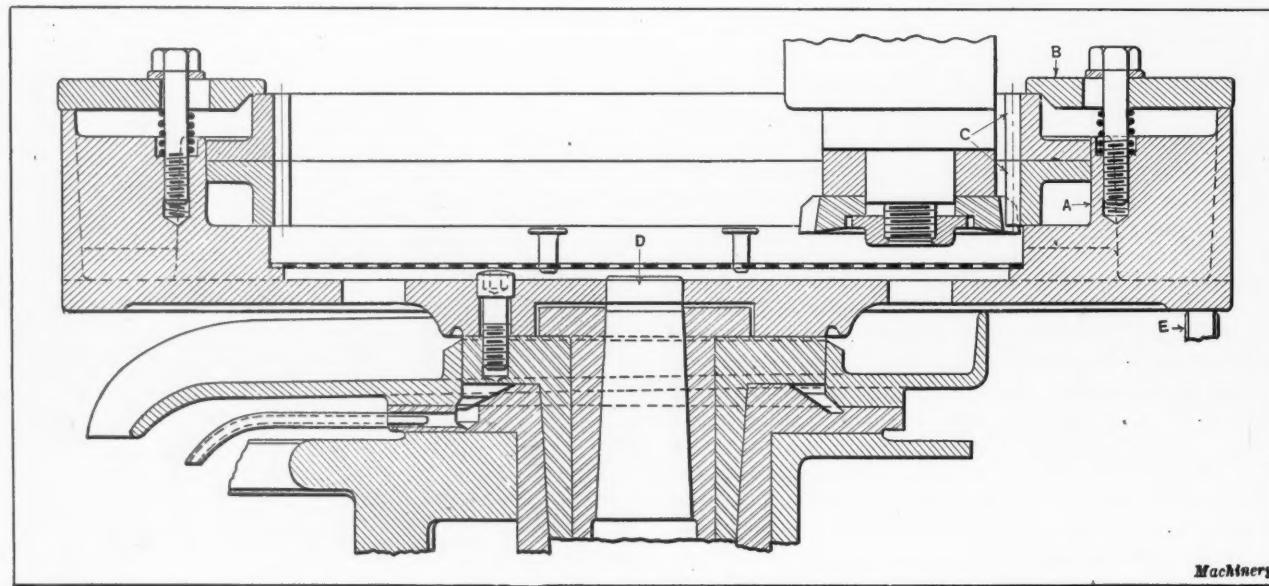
Fixture for holding Internal Gears while cutting on a Gear Shaper
